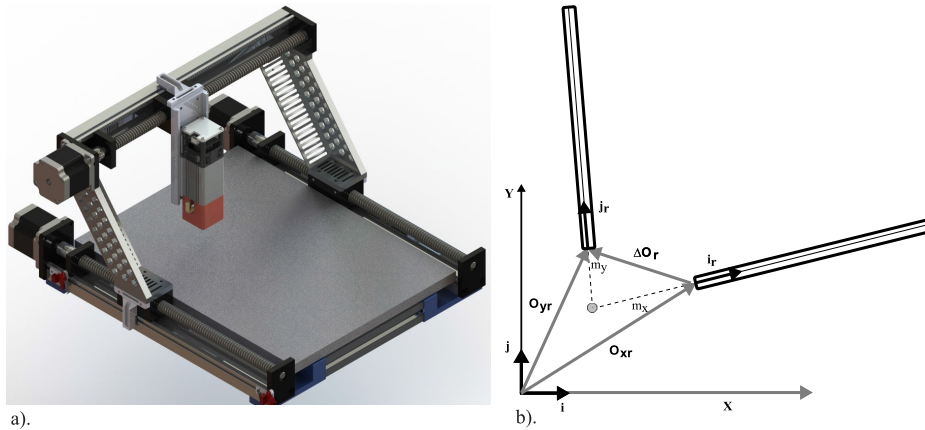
The actual location of the actuators in a CNC machine: (a) Cartesian configuration machine; (b) Geometric representation.
